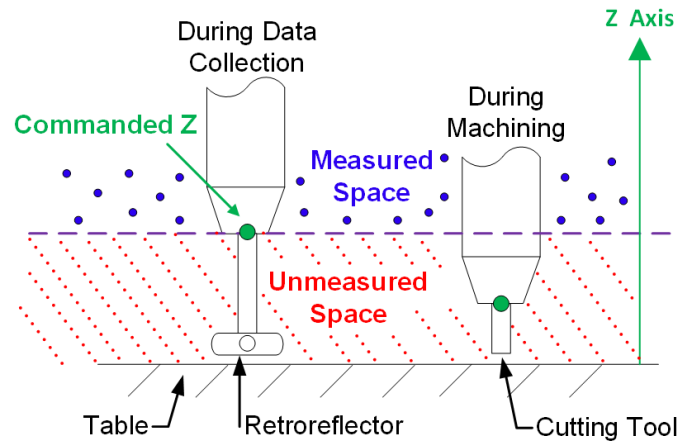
Illustration of Z axis unmeasured space for a three axis machine tool.
